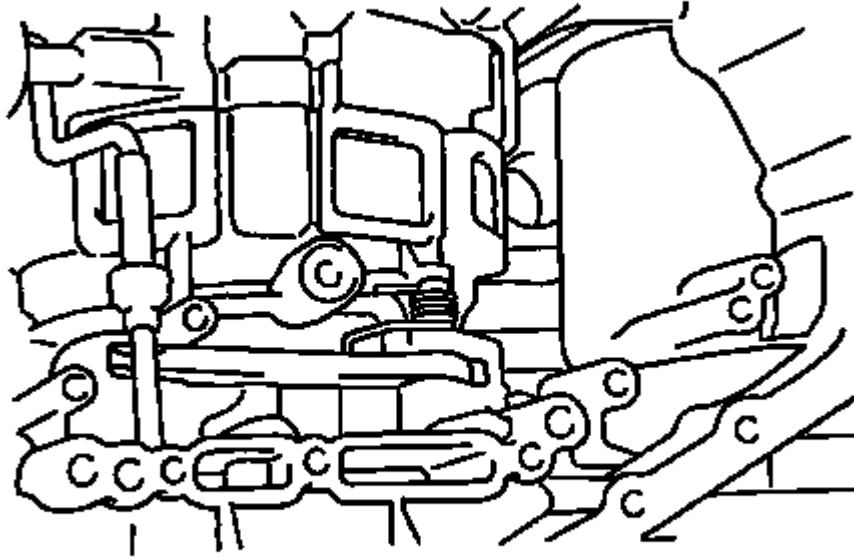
Parking Lock Pawl, Shaft & Torsion Spring
